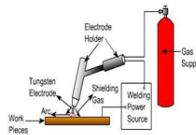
Schematic Diagram of TIG Welding (Courtesy:nptel.ac.in)
